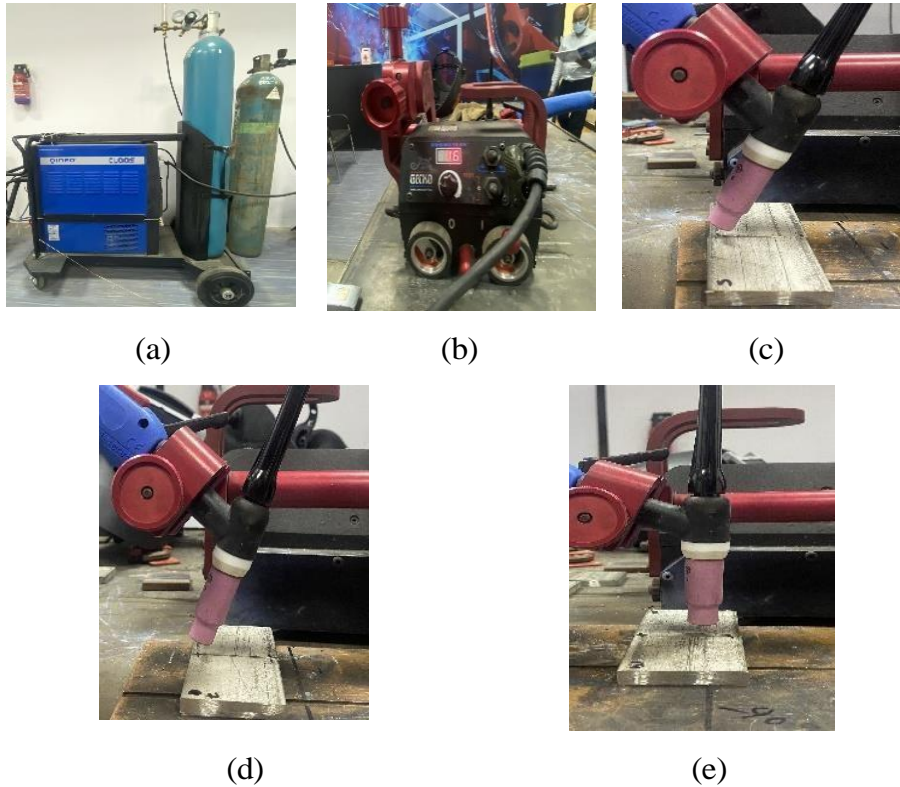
(a) GTAW Machine used, (b) Torch Carriage, (c) Torch Angle set at 60°, (d) Torch Angle set at 75°, (e) Torch Angle set at 90°
